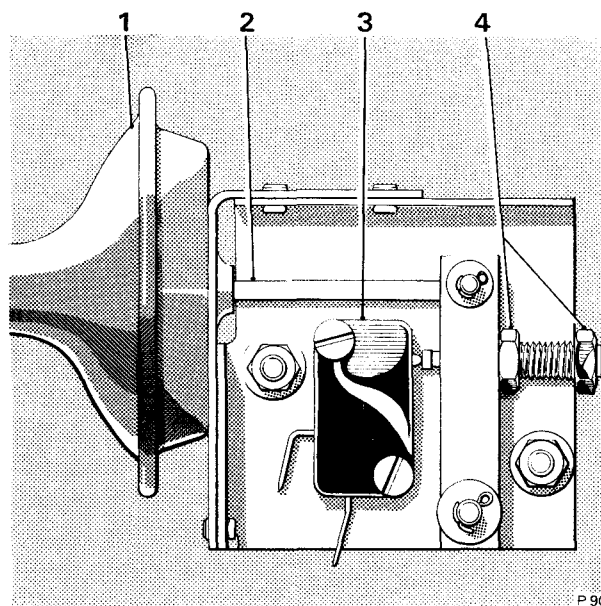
VACUUM OPERATED CUT-IN SWITCH
